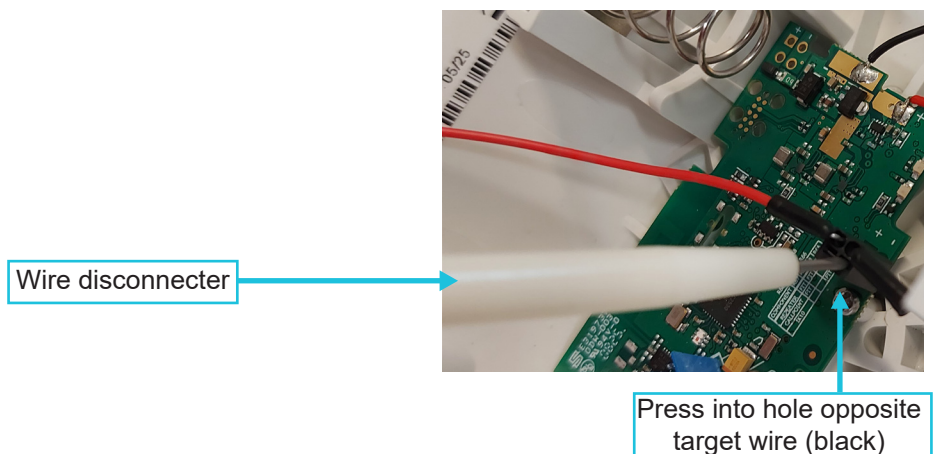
A. Removing a wire from the PCB connector (12VDC power).
